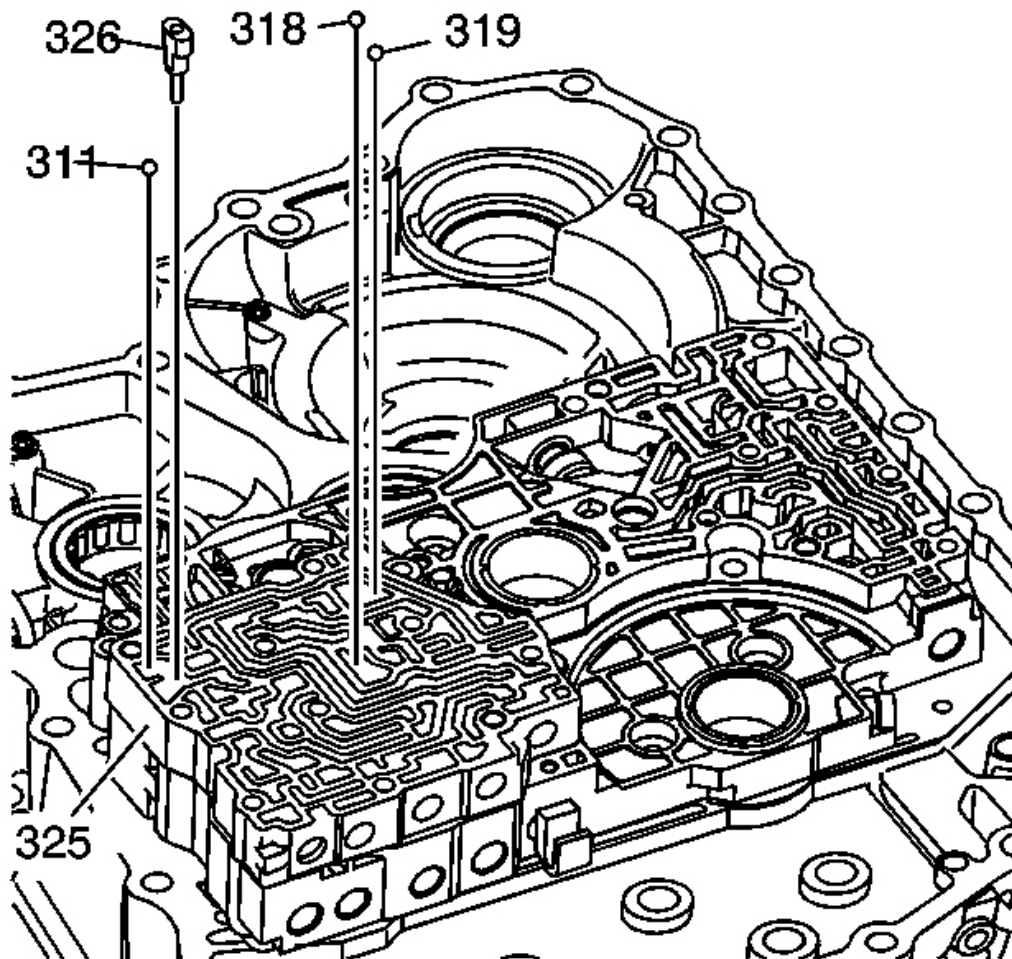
1st/2nd Clutch 7/32 In Check Valve & 1st Accumulator Choke
